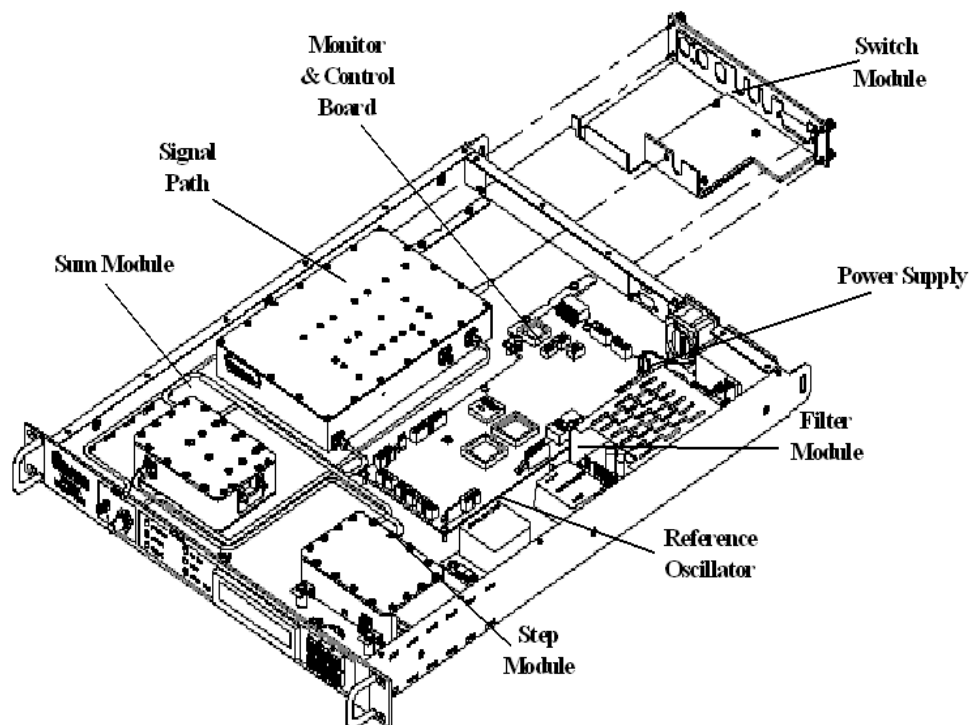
UT-4500-A Series Upconverter Physical Configuration
